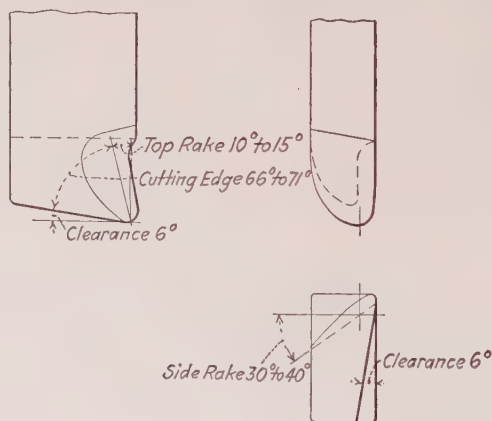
PLANER TOOL FOR ROUGHING ALUMINUM.
